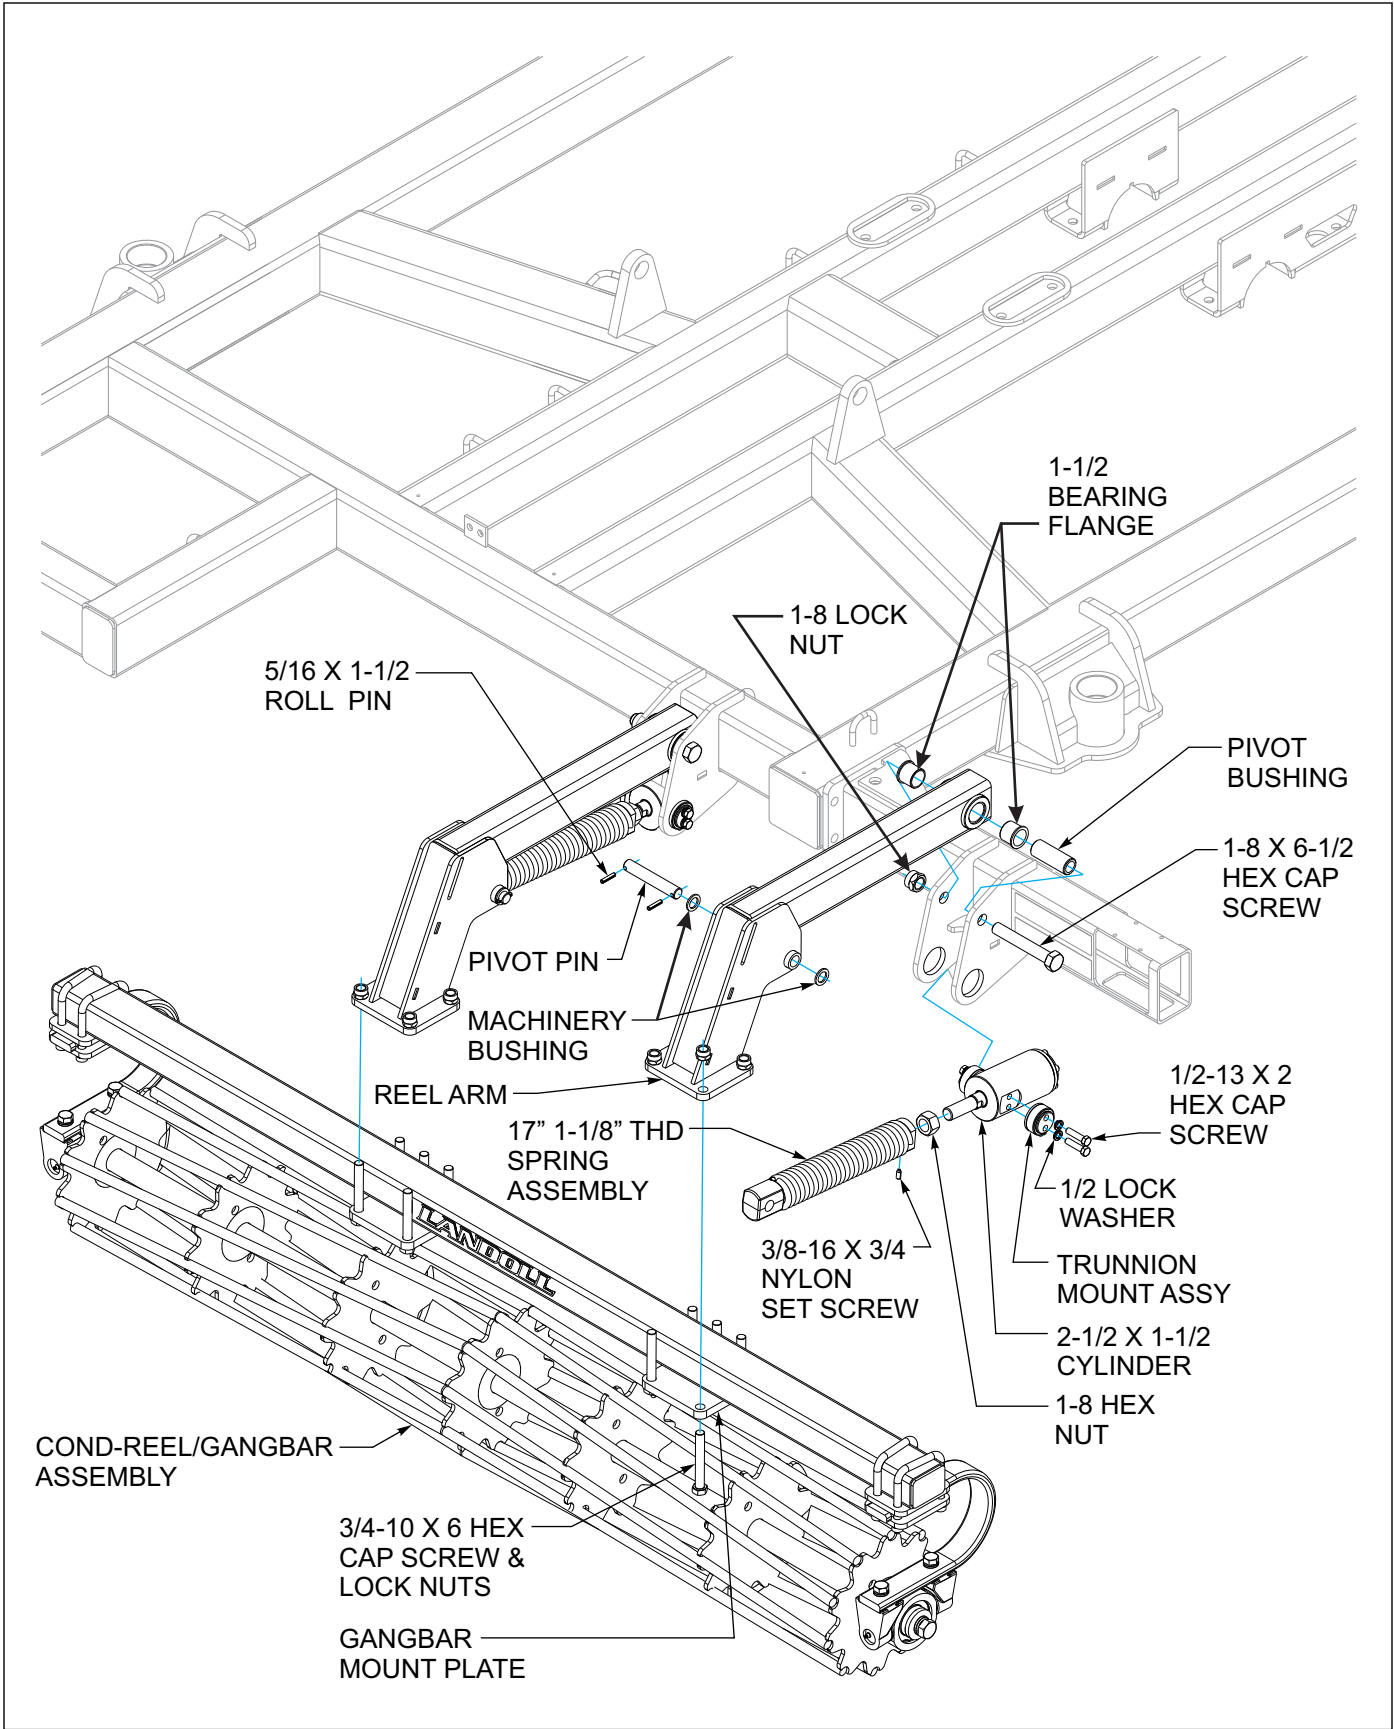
Hydraulic Conditioner Reel Single Installation 7510-14'
